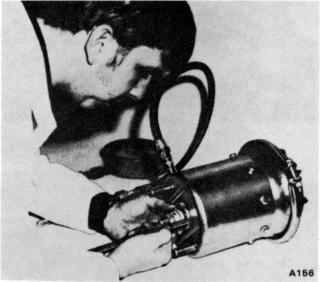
D-14. Adjusting Flange Nut 10. Test the chamber for air leaks by applying air pressure to both inlets. Maximum permissible leakage is 1 lb/min. with a total volume of 200 cu in./100 psi (3278 cm3/6.89 bars) test pressure.
